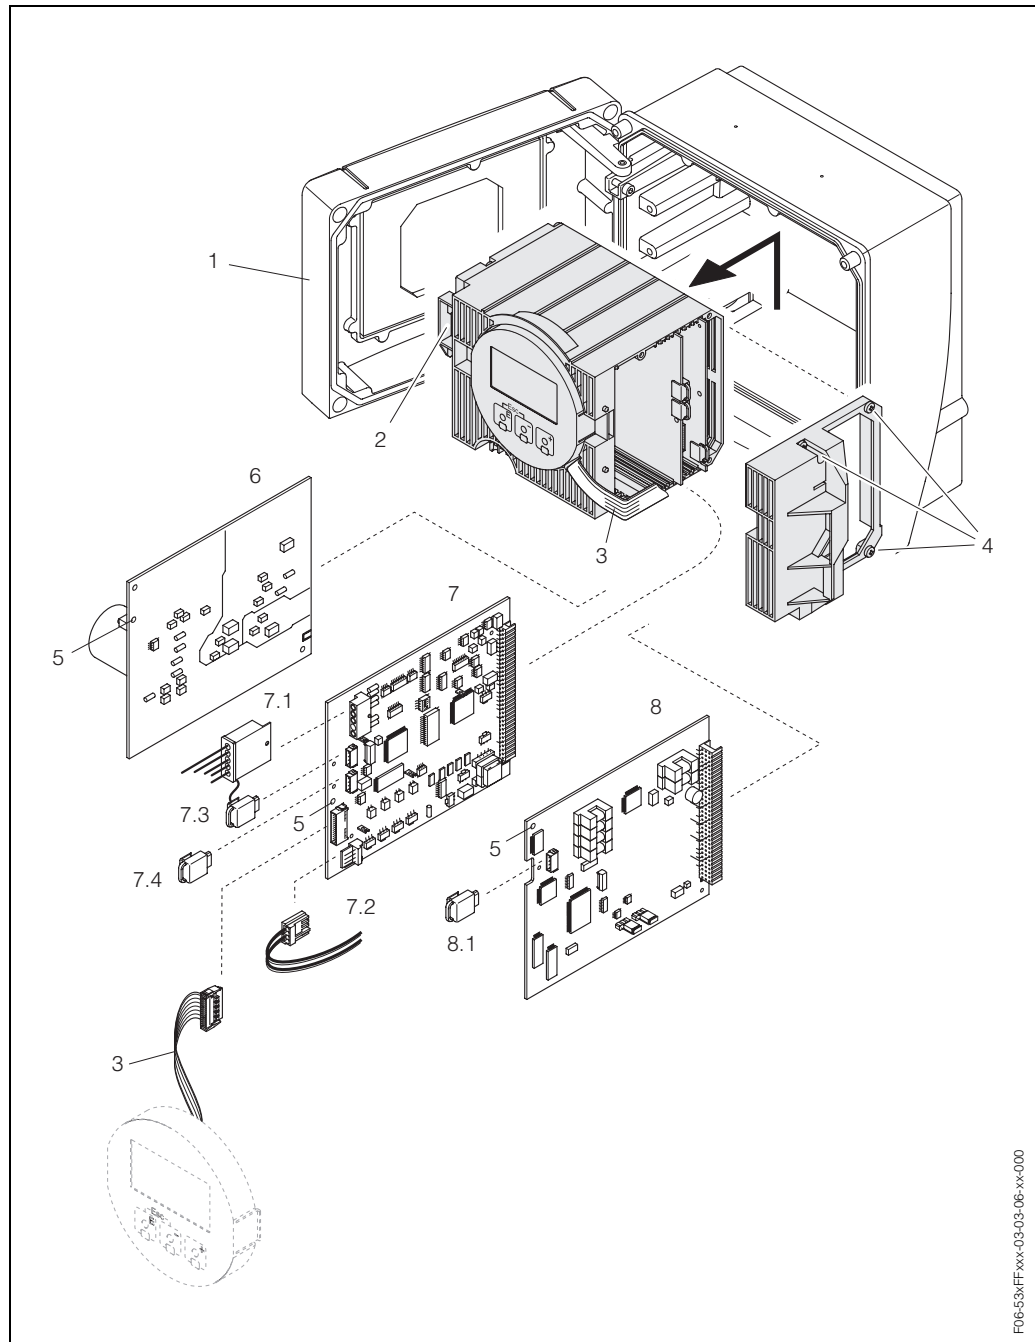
Wall-mounted housing: removing and installing printed circuit boards
